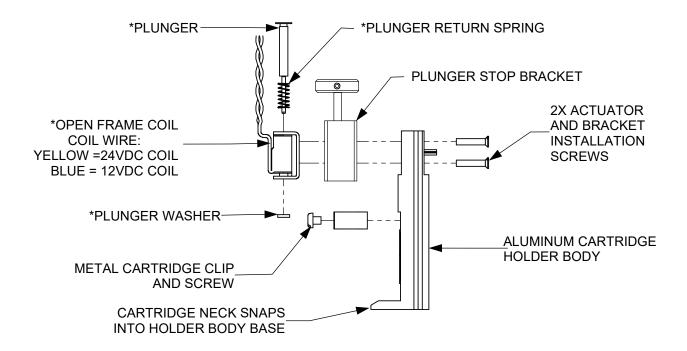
Exploded view of Plunger Stop Bracket, Actuator Assembly (items with *) and Cartridge Holder Body. Install screws through Holder Body first or non-repairable damage to coil will occur.
